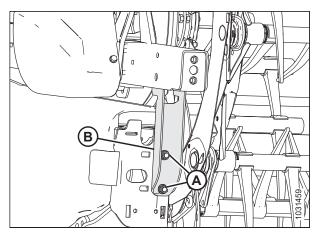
Outboard Reel Arm Supports – D1XL Header Shown
